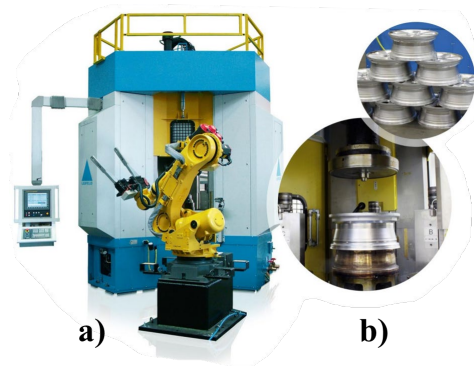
The flow-forming station (a) and a detail of the rotating spindle supporting a wheel (b).
